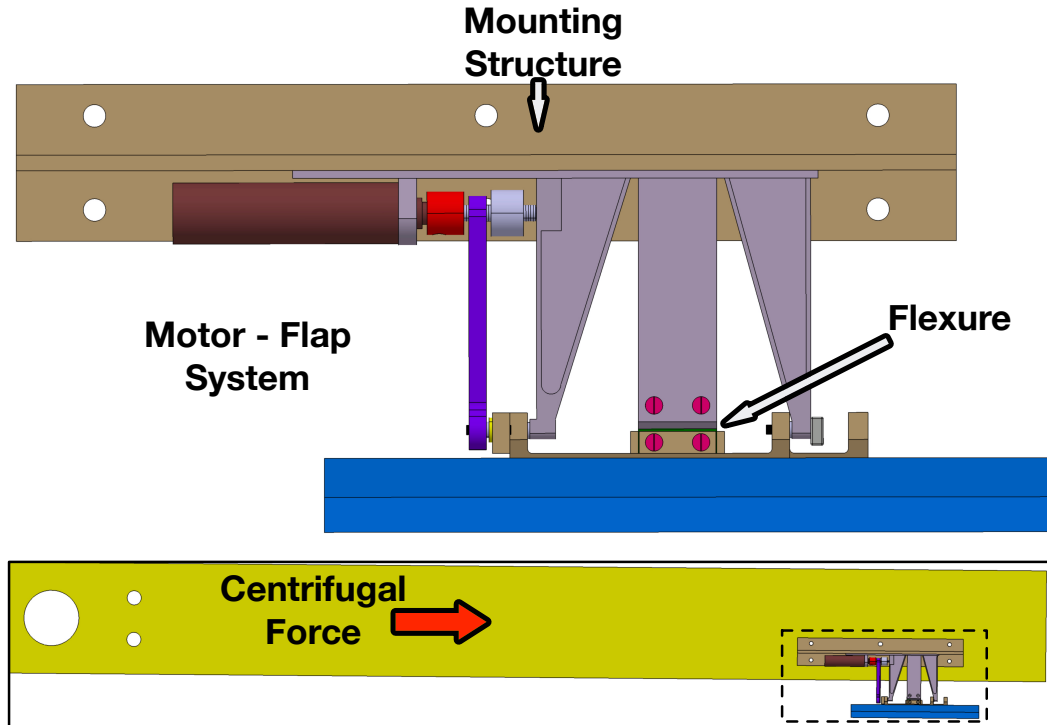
Motor-flap system with flexure in vacuum spin chamber.
